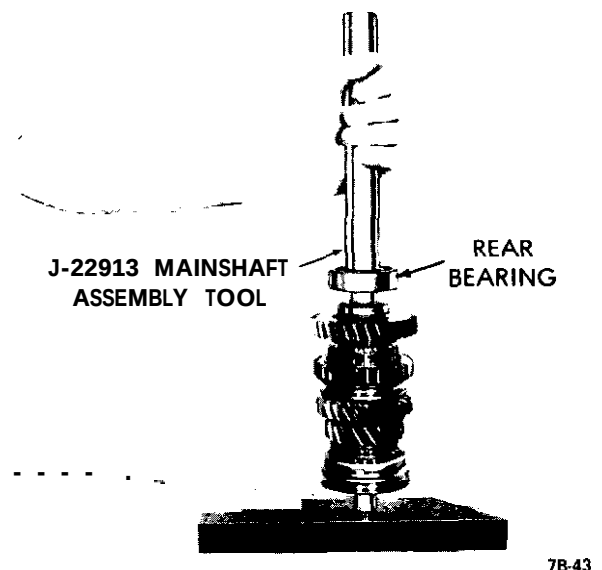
B-43 Pressing on Rear Bearing Using Tool J-22913
